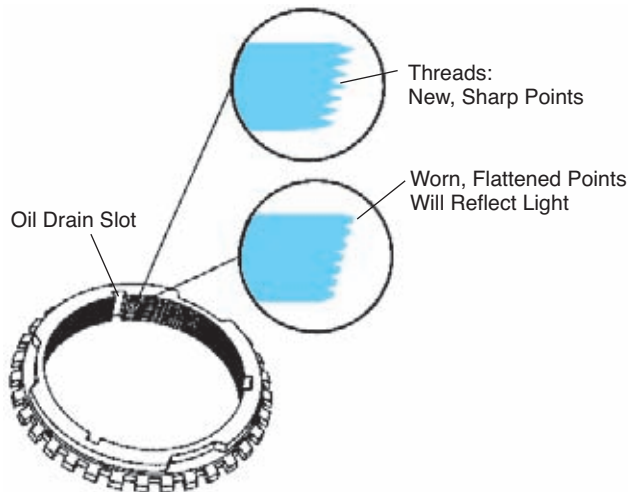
The threadlike grooves of a new blocker ring are sharp so they cut through the lubrication film. They become flattened as they wear, and the edges will reflect light.
